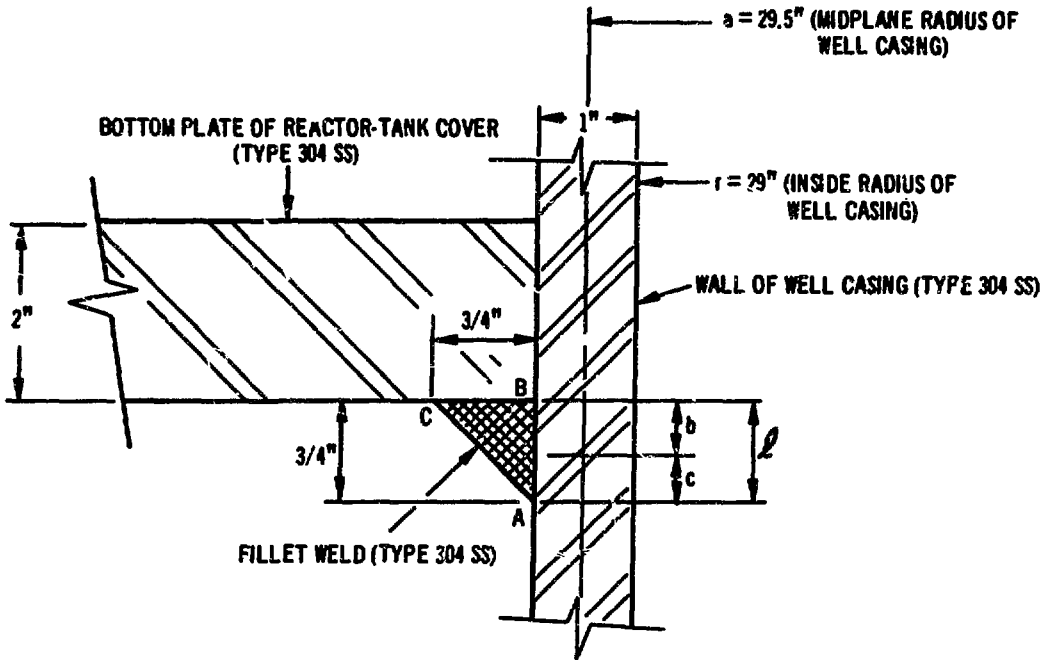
Location of Fillet Weld Holding IHX Well Casing to Bottom Plate of Reactor-tank Cover
